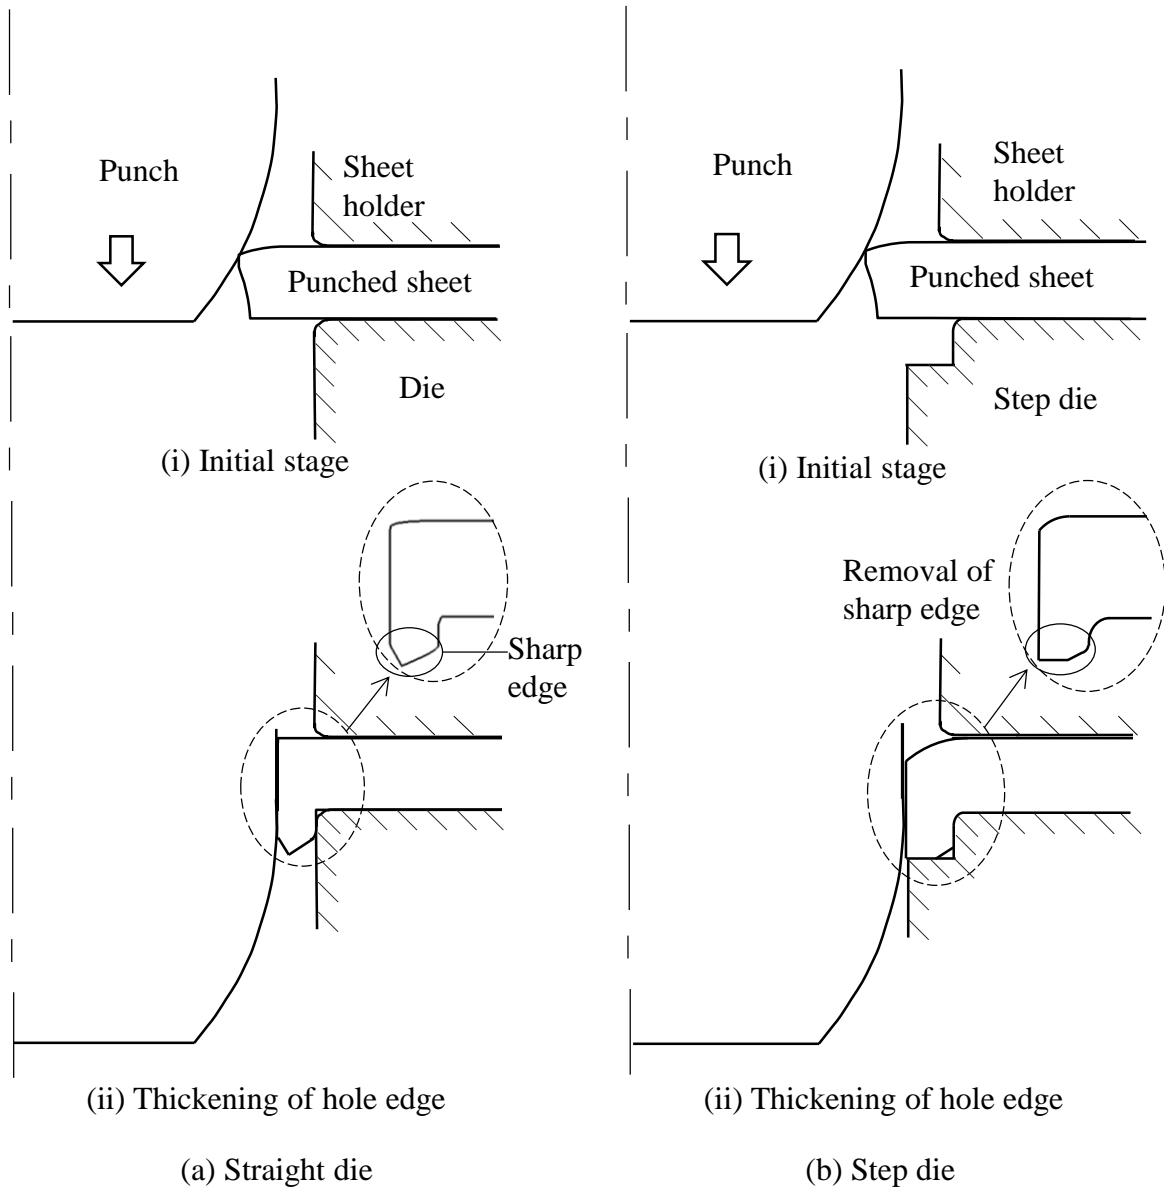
One side thickening of hole edge of high strength steel sheet by hole flanging process for (a) straight and (b) step dies.
